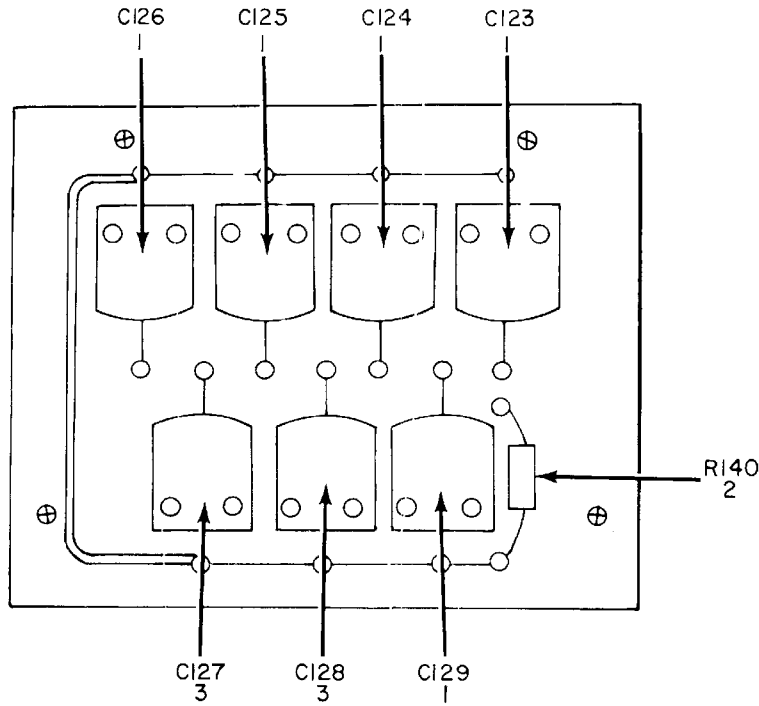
Test Set, Insulated Boot TS-1811/GSM-83, Drive Assembly.
